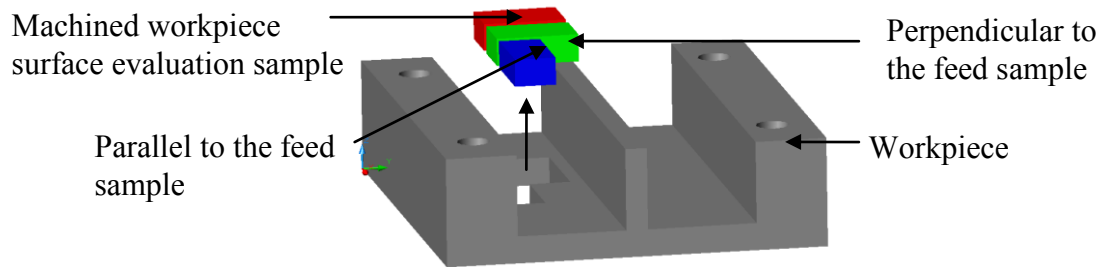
Schematic showing location and nomenclature of samples used for creep feed ground workpiece surface integrity assessment
